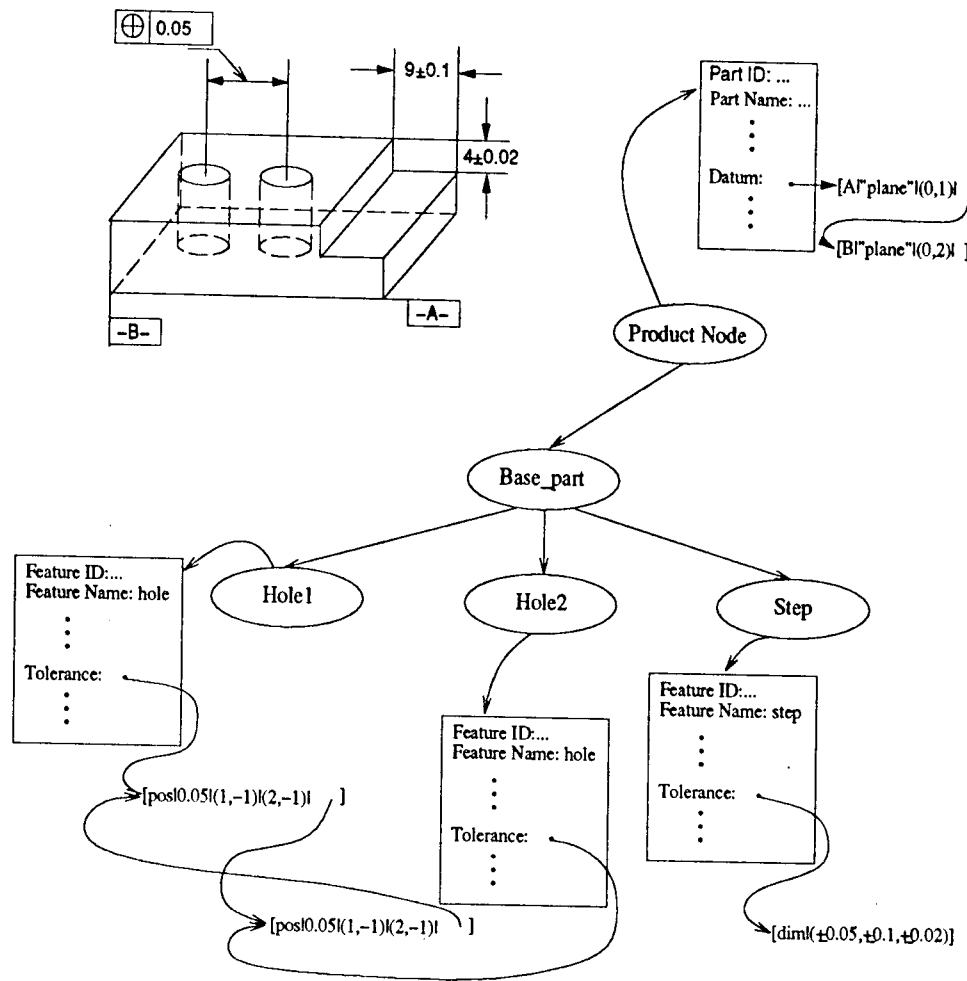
An Example of Dimensions, Tolerances, and Datum Attachment
